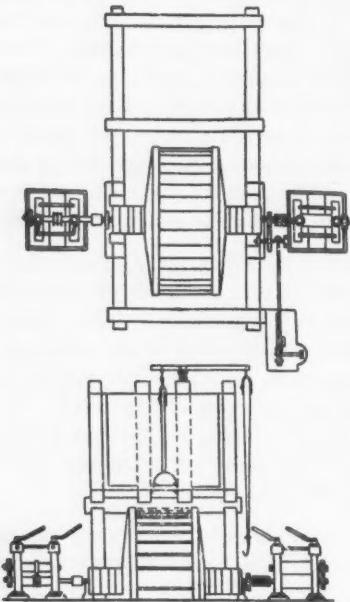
Rolling and cutting mill of P. M. Zalesov design at the Tomsk Works.
